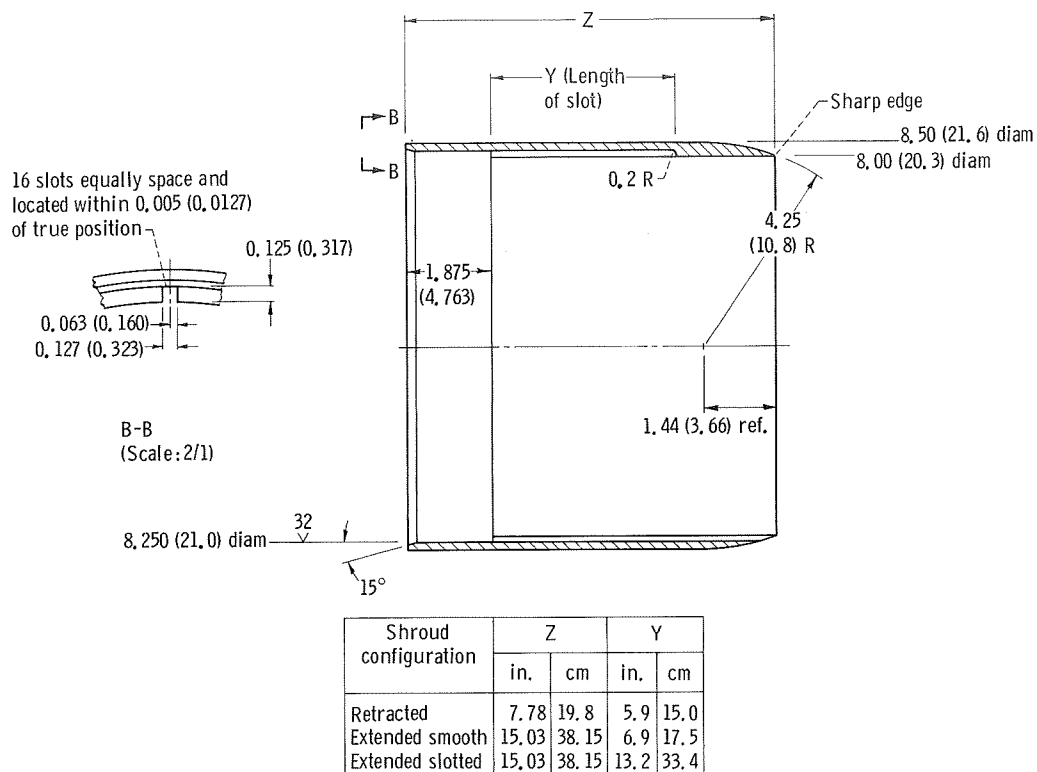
Shroud details. (All dimensions are in inches (cm).)
